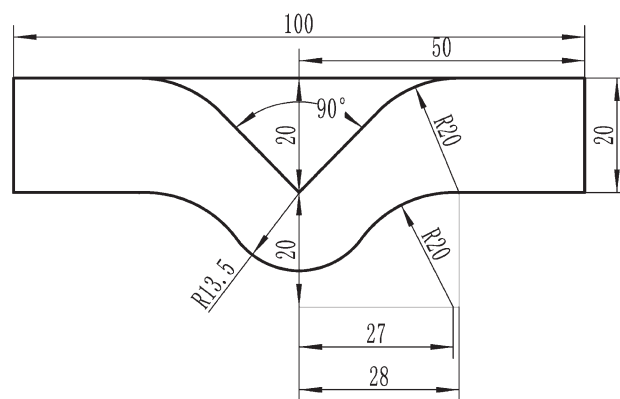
Profile and detailed dimensions (mm) of the Die C type tear specimen.
